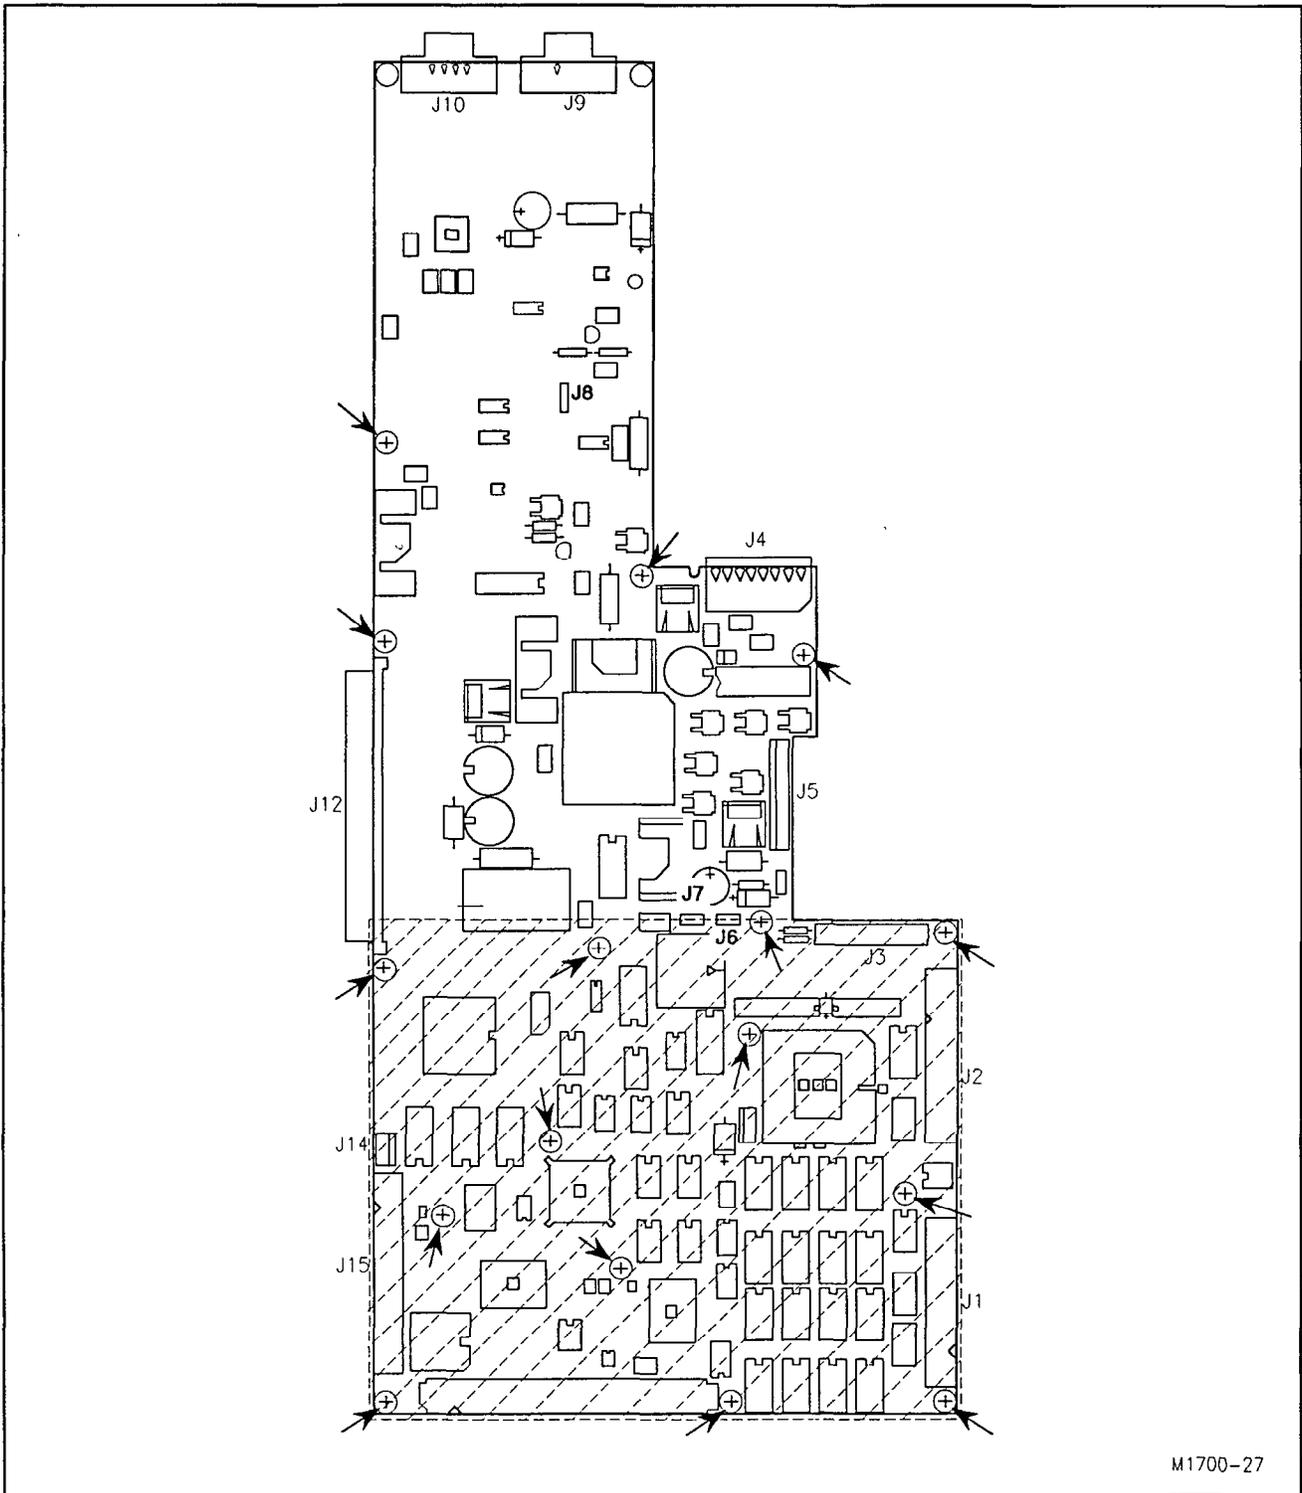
Screw and Connector Locations on the CPU Assembly.
